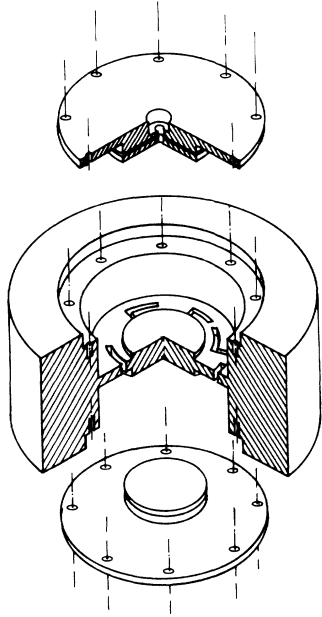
Exploded view of the electromechanical transducer used for the measurements.
